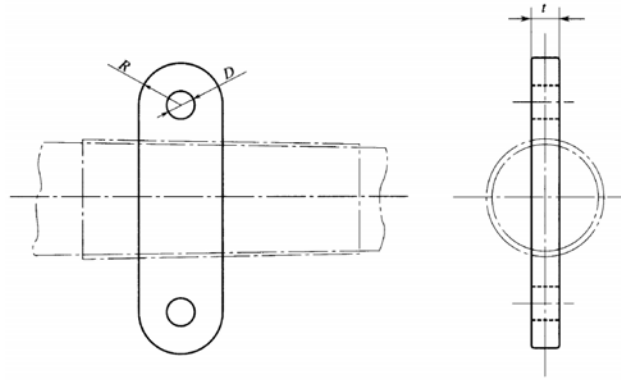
Fitting attached at Head of Derrick Boom
